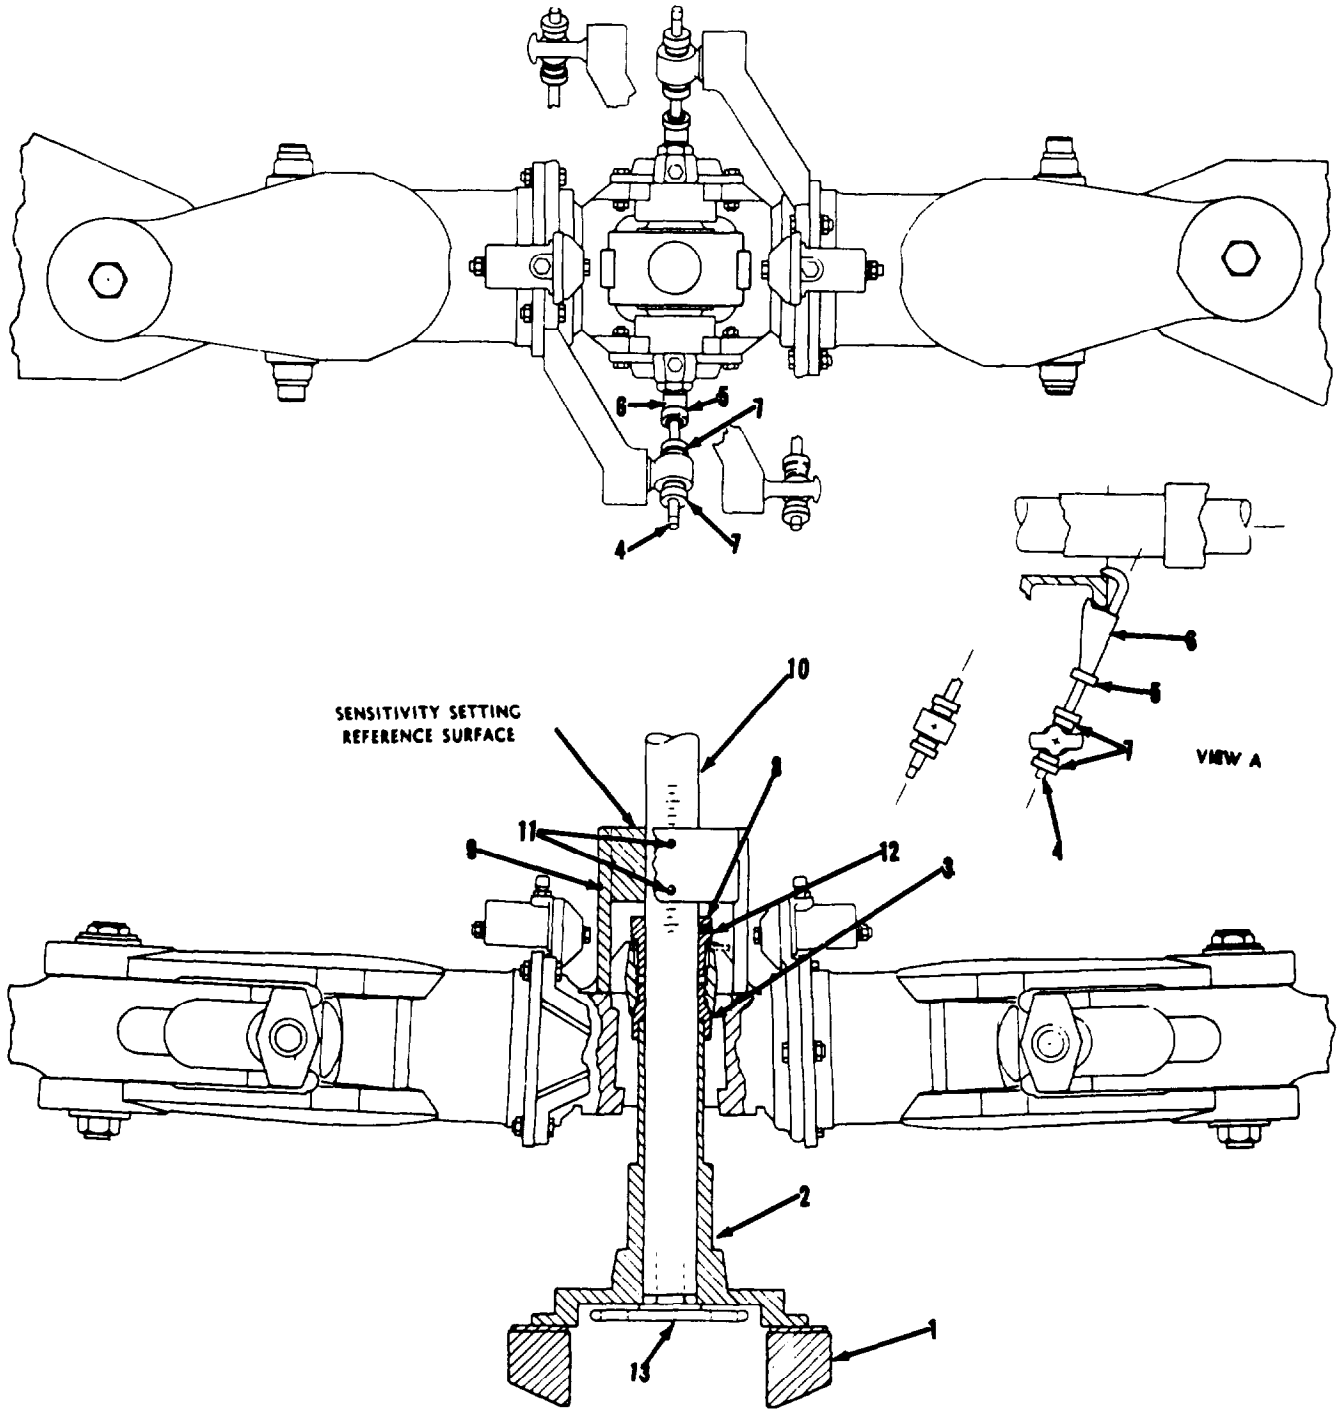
Balancer Installation - OH-58 Series Main Rotor Hub and Blade Assemblies (Typical).
